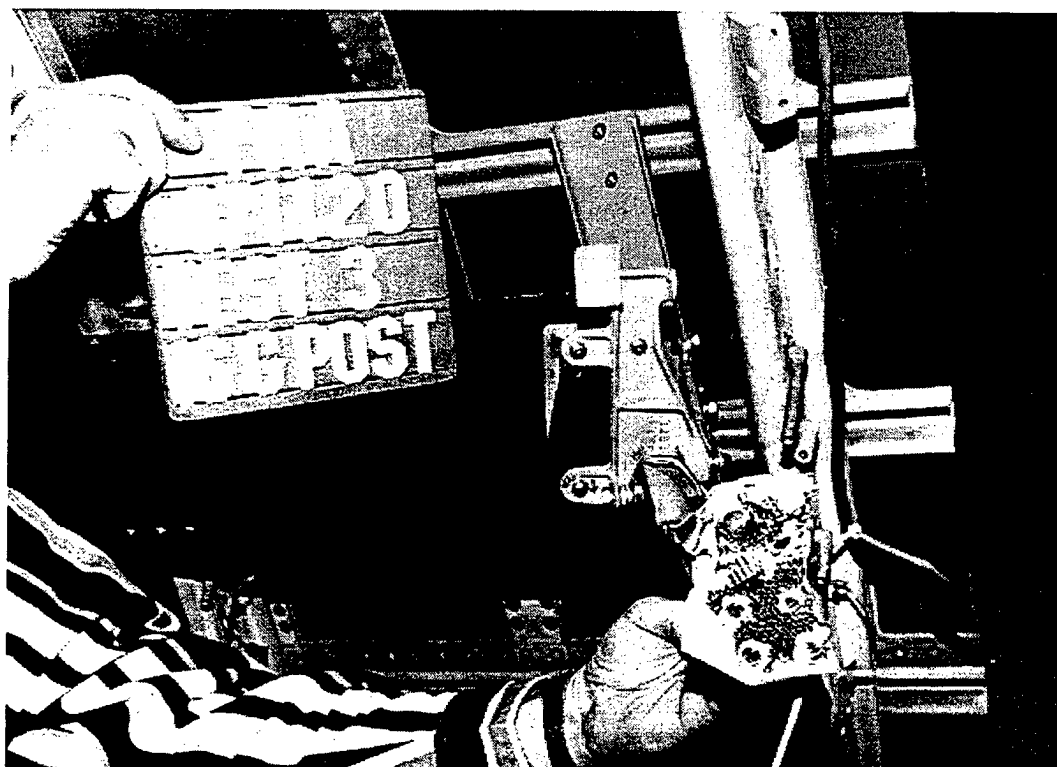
POSTTEST BIN A FRONT LOWER SUPPORT VIEW 3
